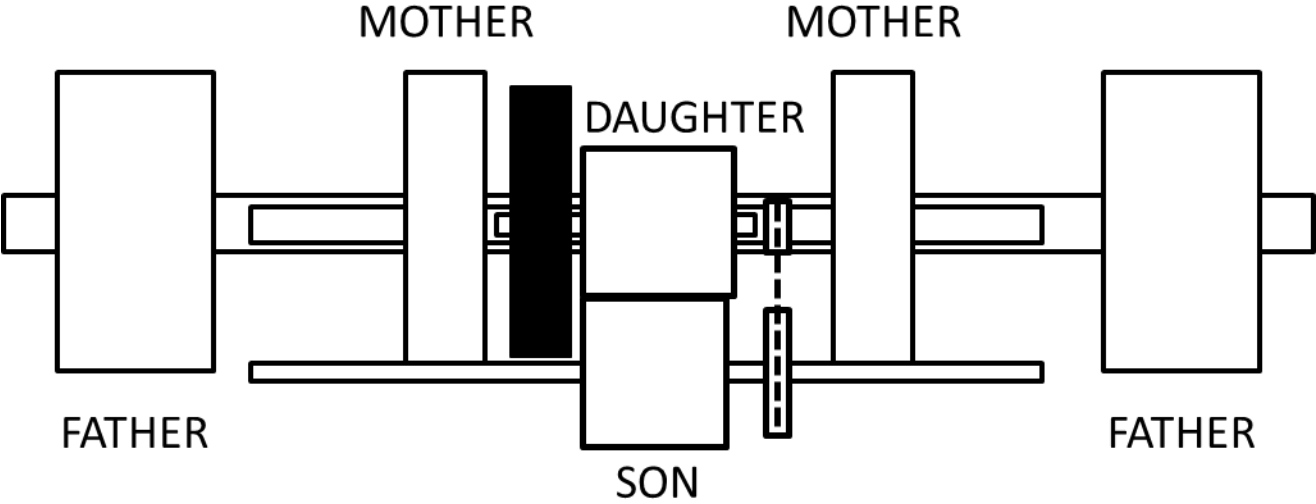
A front view of ED.L.'s Sweet Sixteen family of cylinders.
